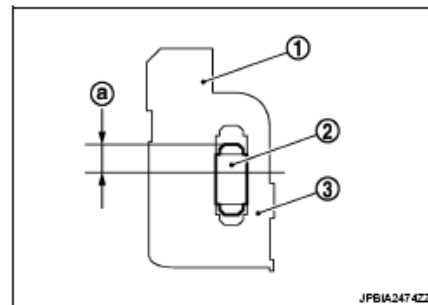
Identifying Actuator Bracket And Valve Ladder Assembly
